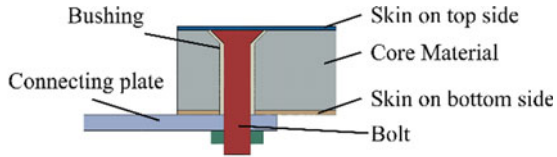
Shear test phenomena in the bolt connection structures of Sandwich Composite Plate
